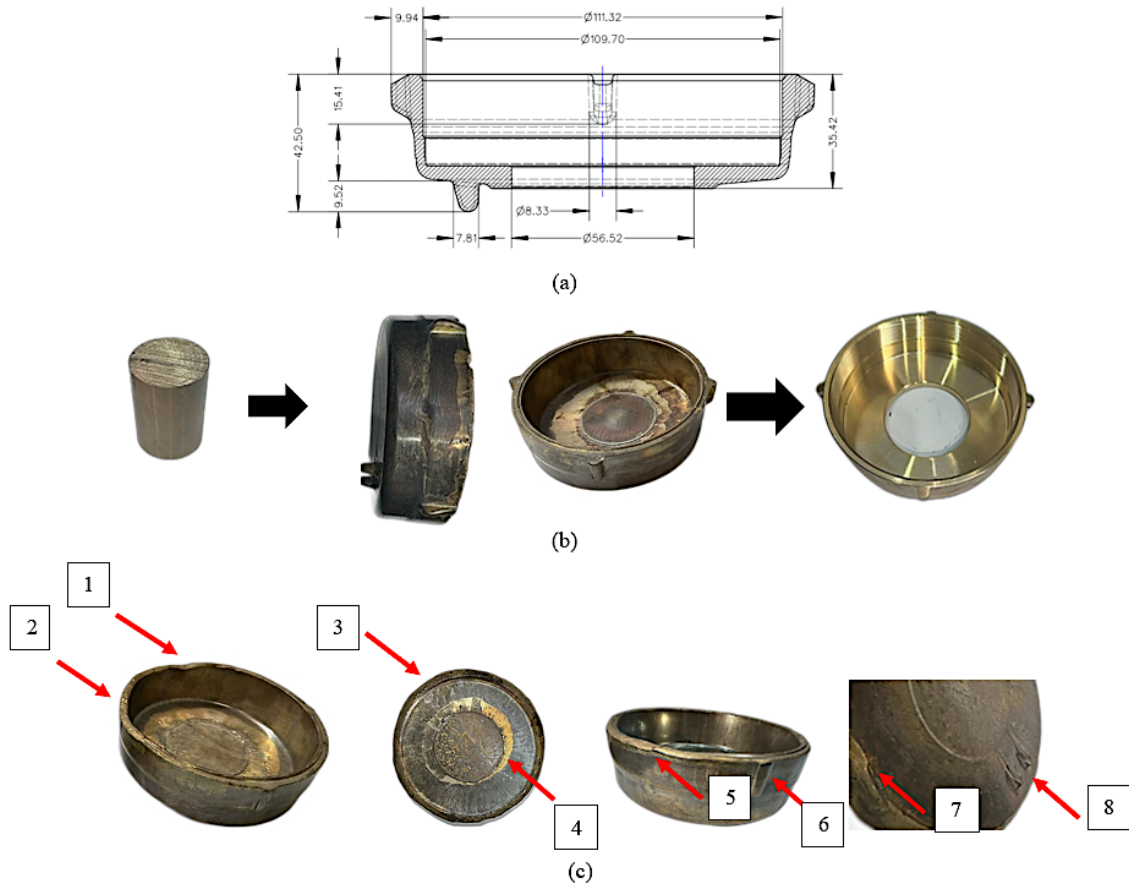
Technical drawing of the valve cover (a), forging of the brass body cover from start to finish (b), and defective parts formed during the forging process (c).
